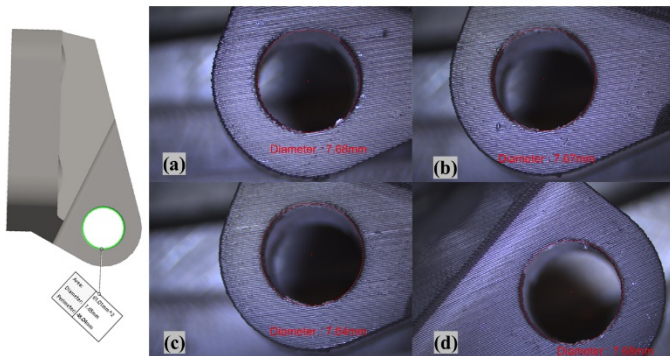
POST-SINTERED BRACKET WITH 60% TOPOLOGY OPTIMIZATION, SHOWING (a) TOP, (b) SIDE-TOP, (c) FRONT, AND (d) BOTTOM VIEWS.
